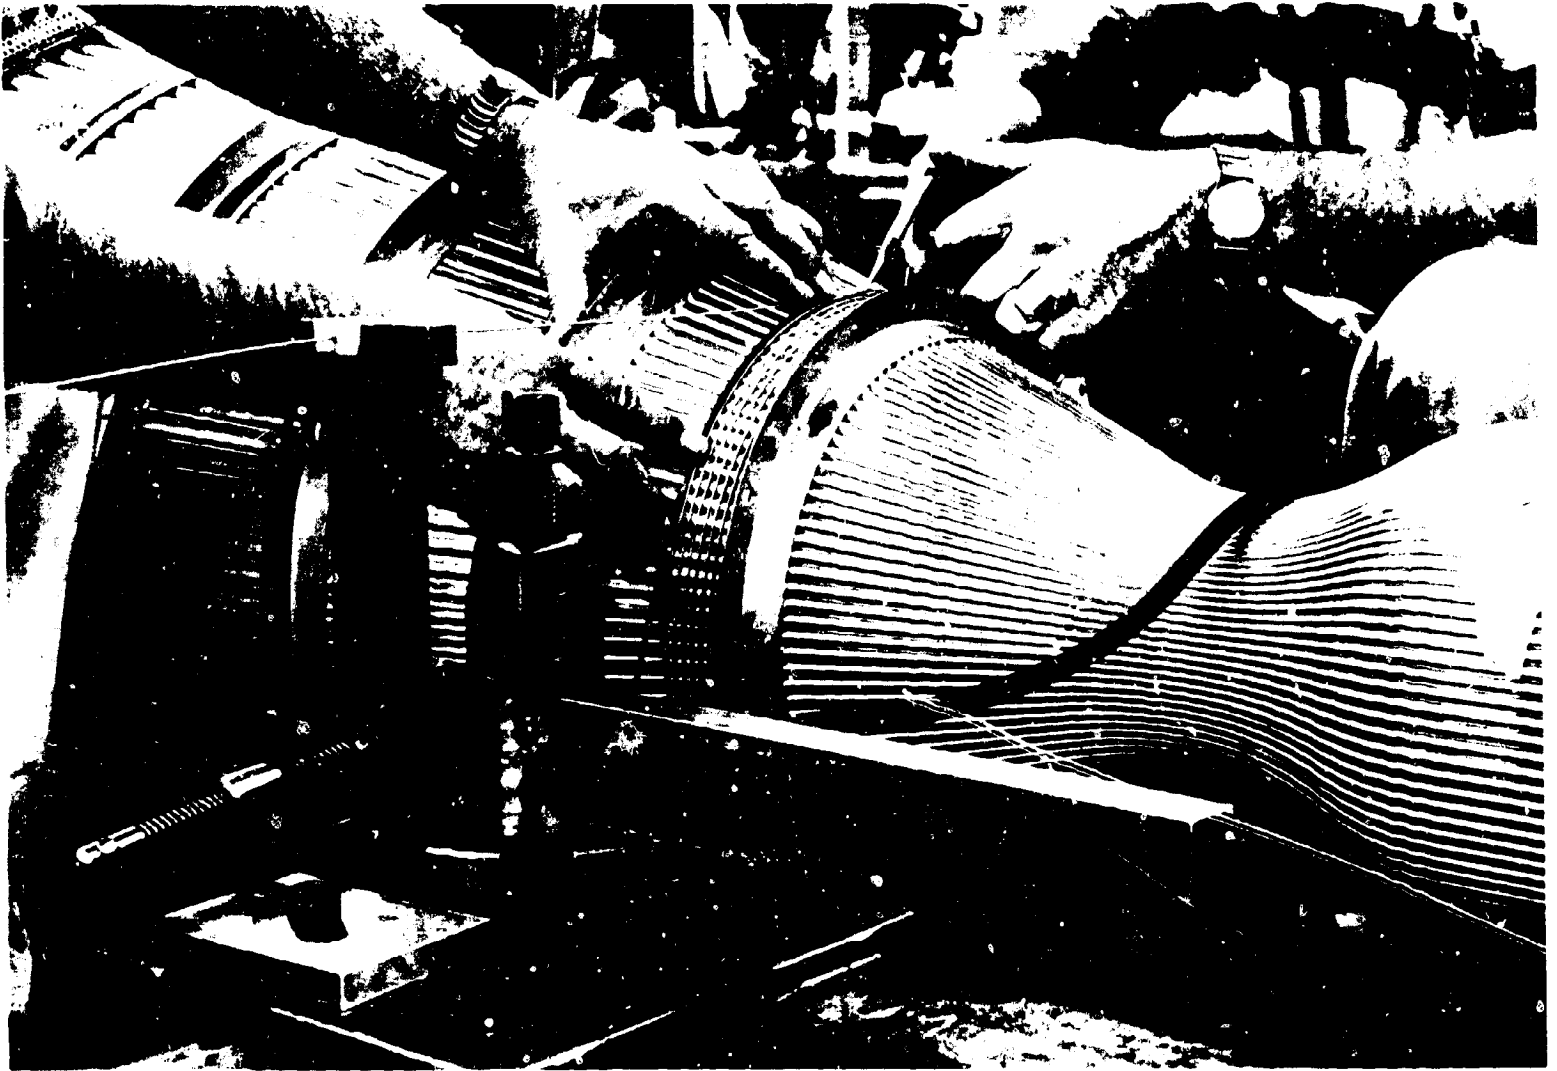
Spotwelding wire wrapping to aft bell of 20:1-expansion chamber.
